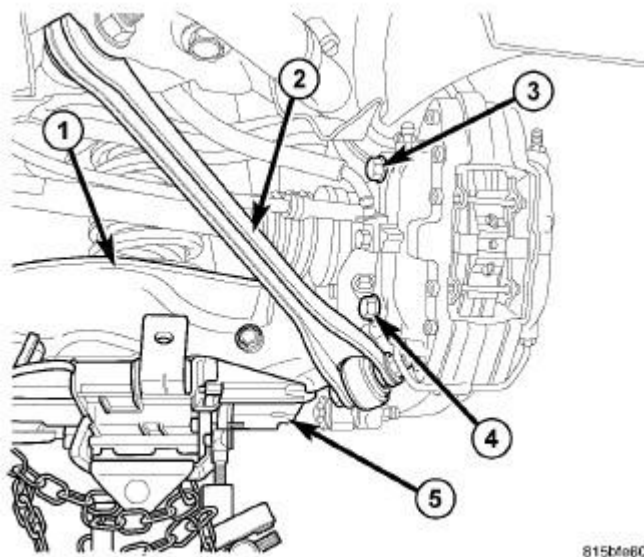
ACCESSING REAR CALIPER MOUNTING BOLTS
